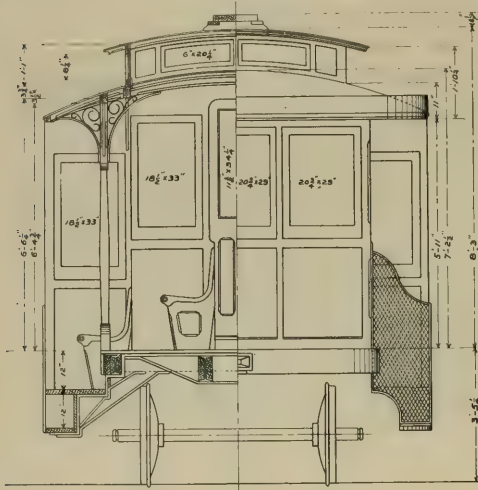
HALF SECTION AND HALF END ELEVATION.
